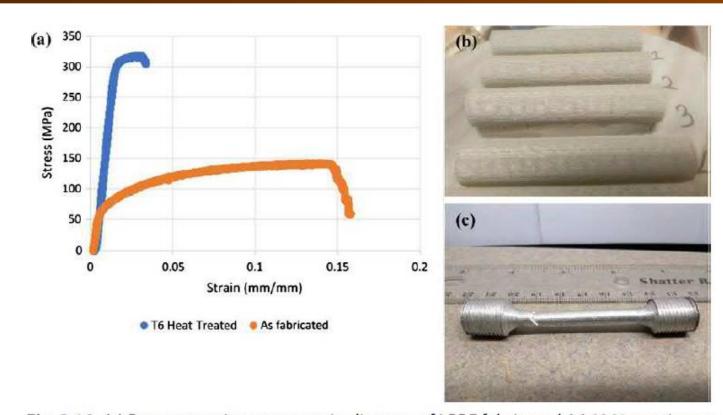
(a) Representative stress-strain diagram of LPBF fabricated AA6061 specimens as fabricated and T6 heat treated. (b) Solid cylinders built in *X*-direction and still on build plate; tensile specimens were machined out of these cylinders. (c) LPBF fabricated AA6061 tensile testing specimen after fractured. (*Uddin, S.Z., Murr, L.E., Terrazas, C.A., Morton, P., Roberson, D.A., Wicker, R.B., 2018. Addit. Manuf. 22, 405. With kind permission of Elsevier.*)
